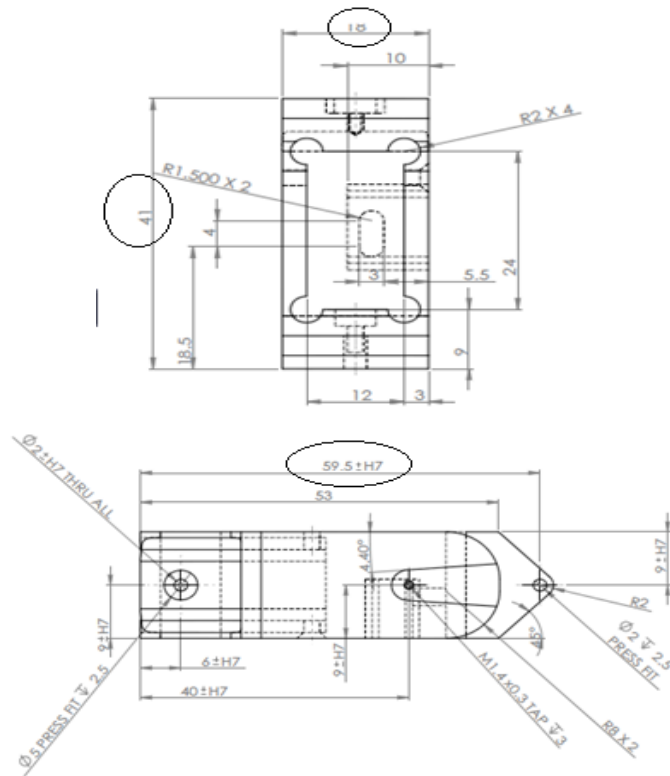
The minimum dimension of the finger body in front view and top view.
